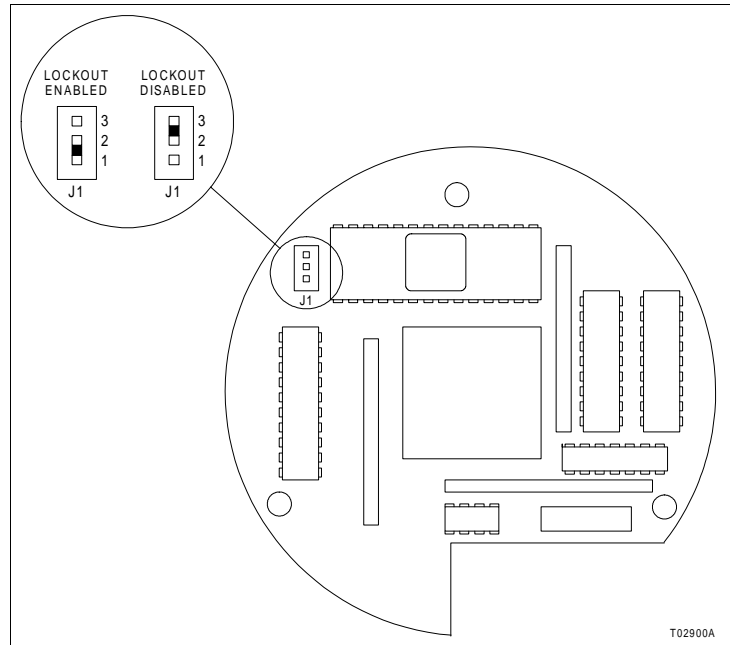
Configuration Lockout Feature Jumper Location on Microcomputer Board
